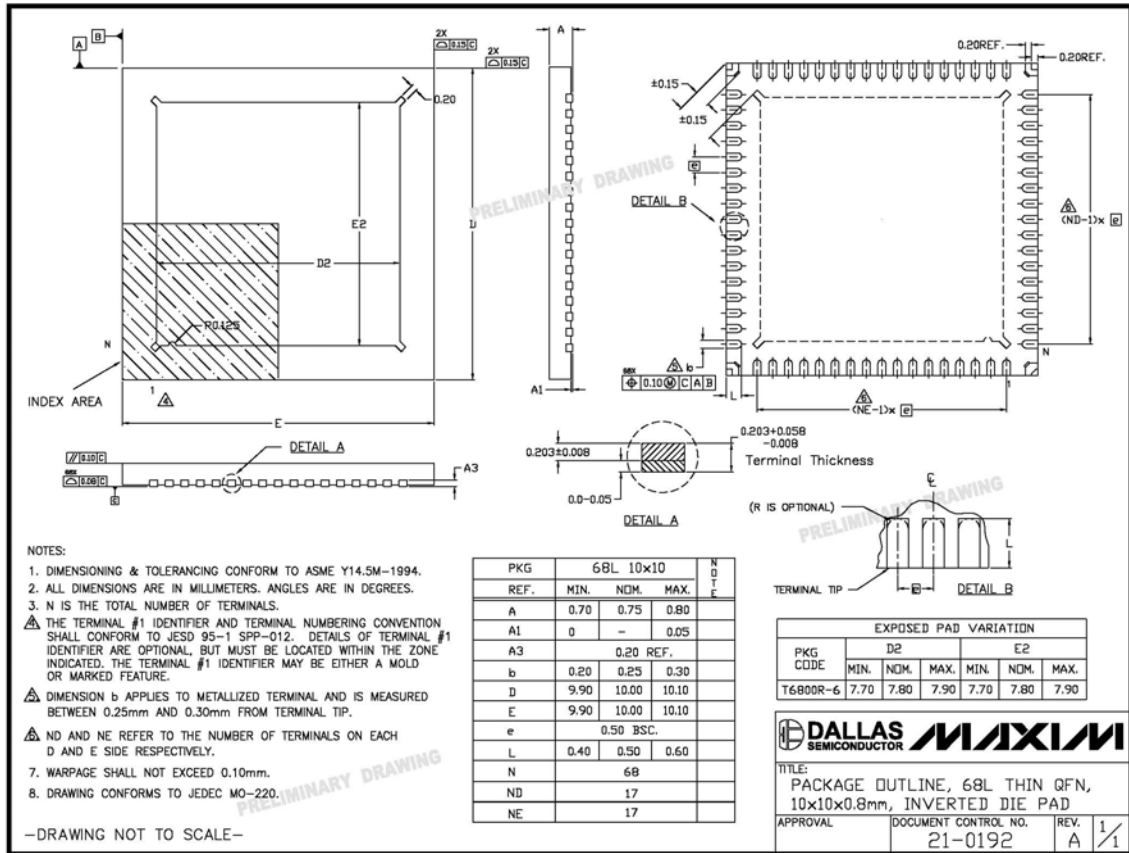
Maxim outline drawing for 10mm QFN package (supplier drawing)
